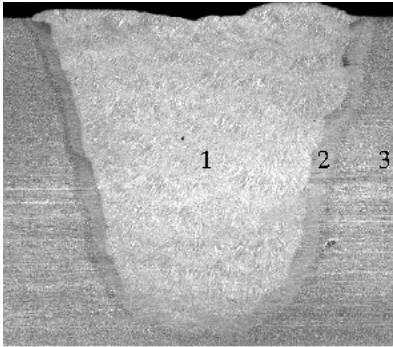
Macroscopic appearance of welded joint: 1-WM, 2-HAZ, 3-BM
